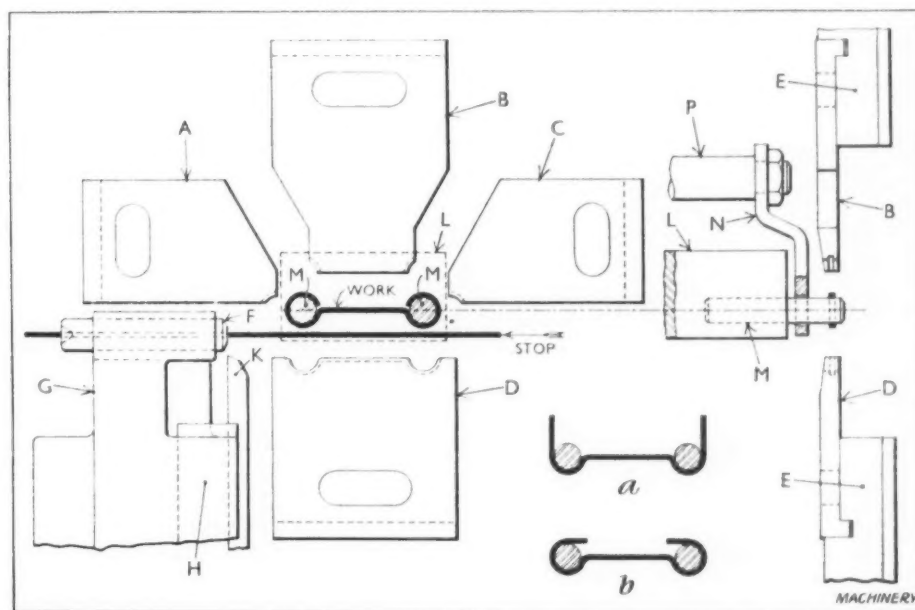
Die or Tool Equipment Used on Four-slide Automatic Wire-forming Machine for Producing the Link Illustrated at W in Fig. 1
